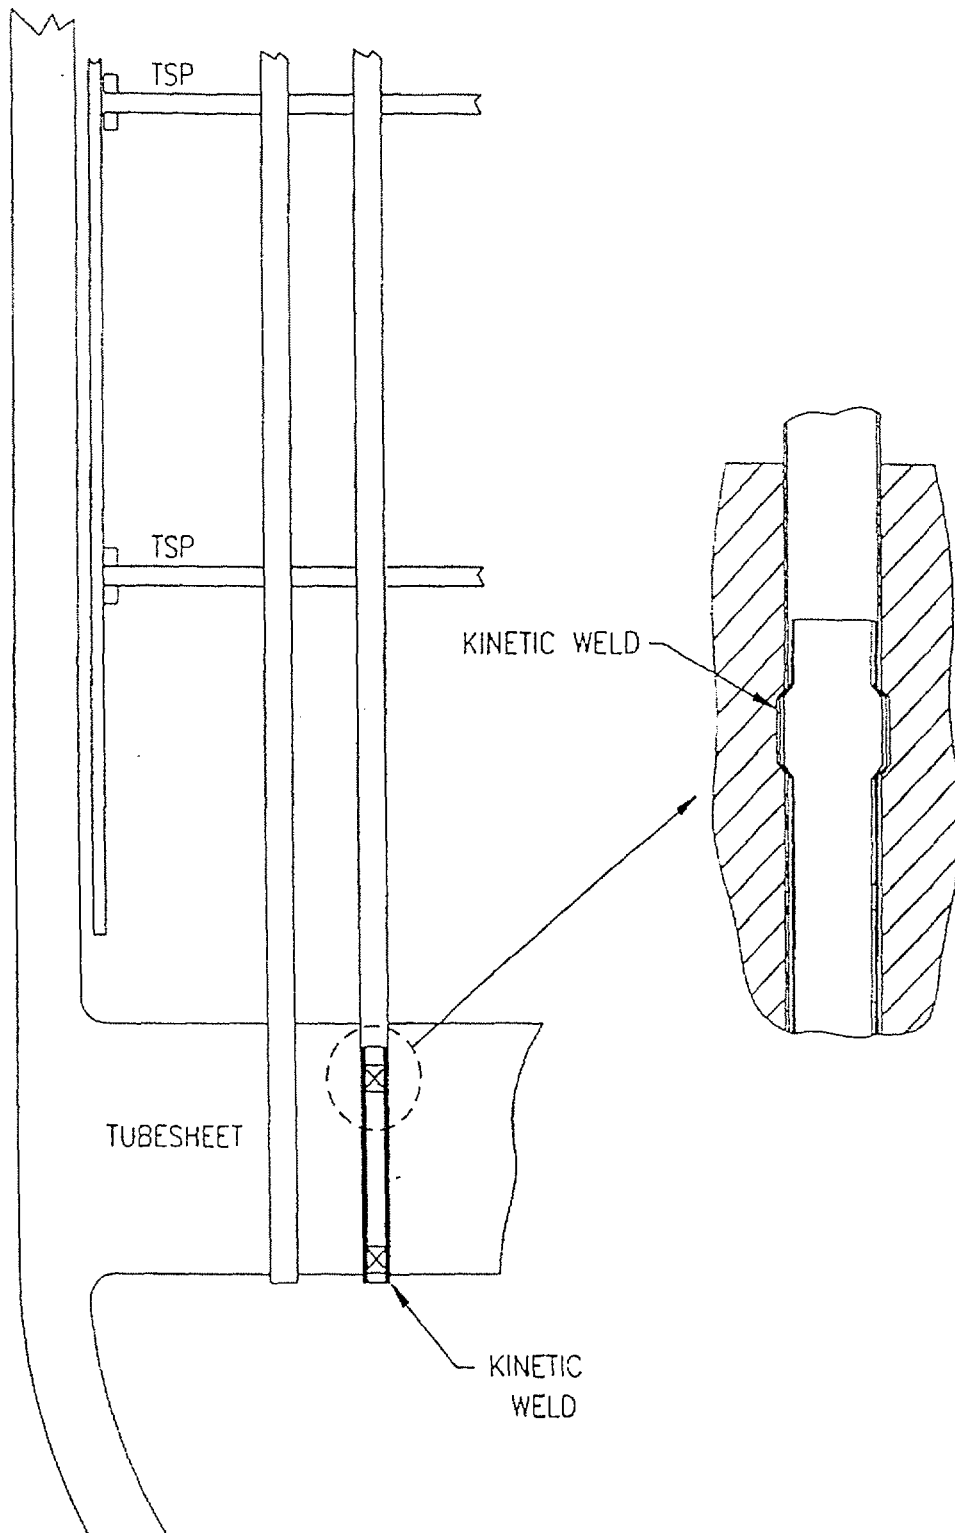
FTI Kinetic Tubesheet and Tube Support Plate Sleeve.
